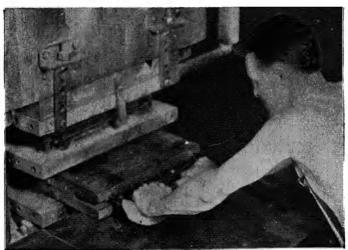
Removing a two-part rubber mold from the heated platens of a molding press.
